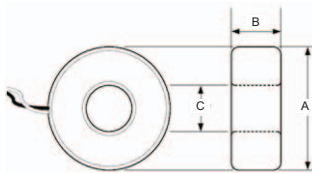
Solid Core Sensor Dimensions (see Table 1).
